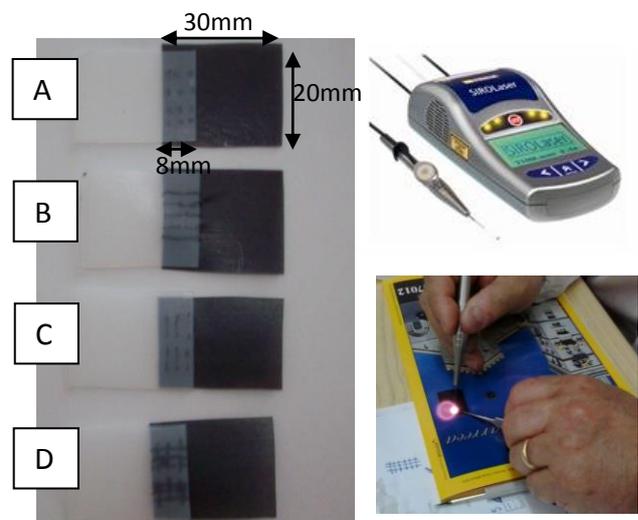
The four types of laser welded polymeric joints (sx), a picture of the diode laser used and its employments (dx).
